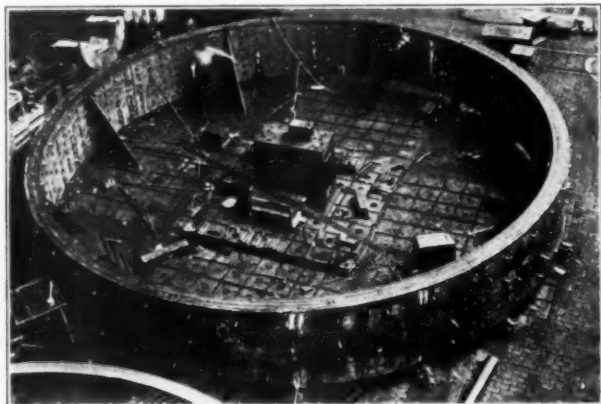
ASSEMBLY OF ROTOR RIM, SHOWING BRACKETS
